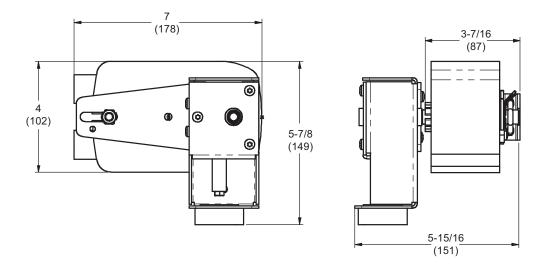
Mx40-704x Linked Actuator Assembly With AV-611 Linkage.
